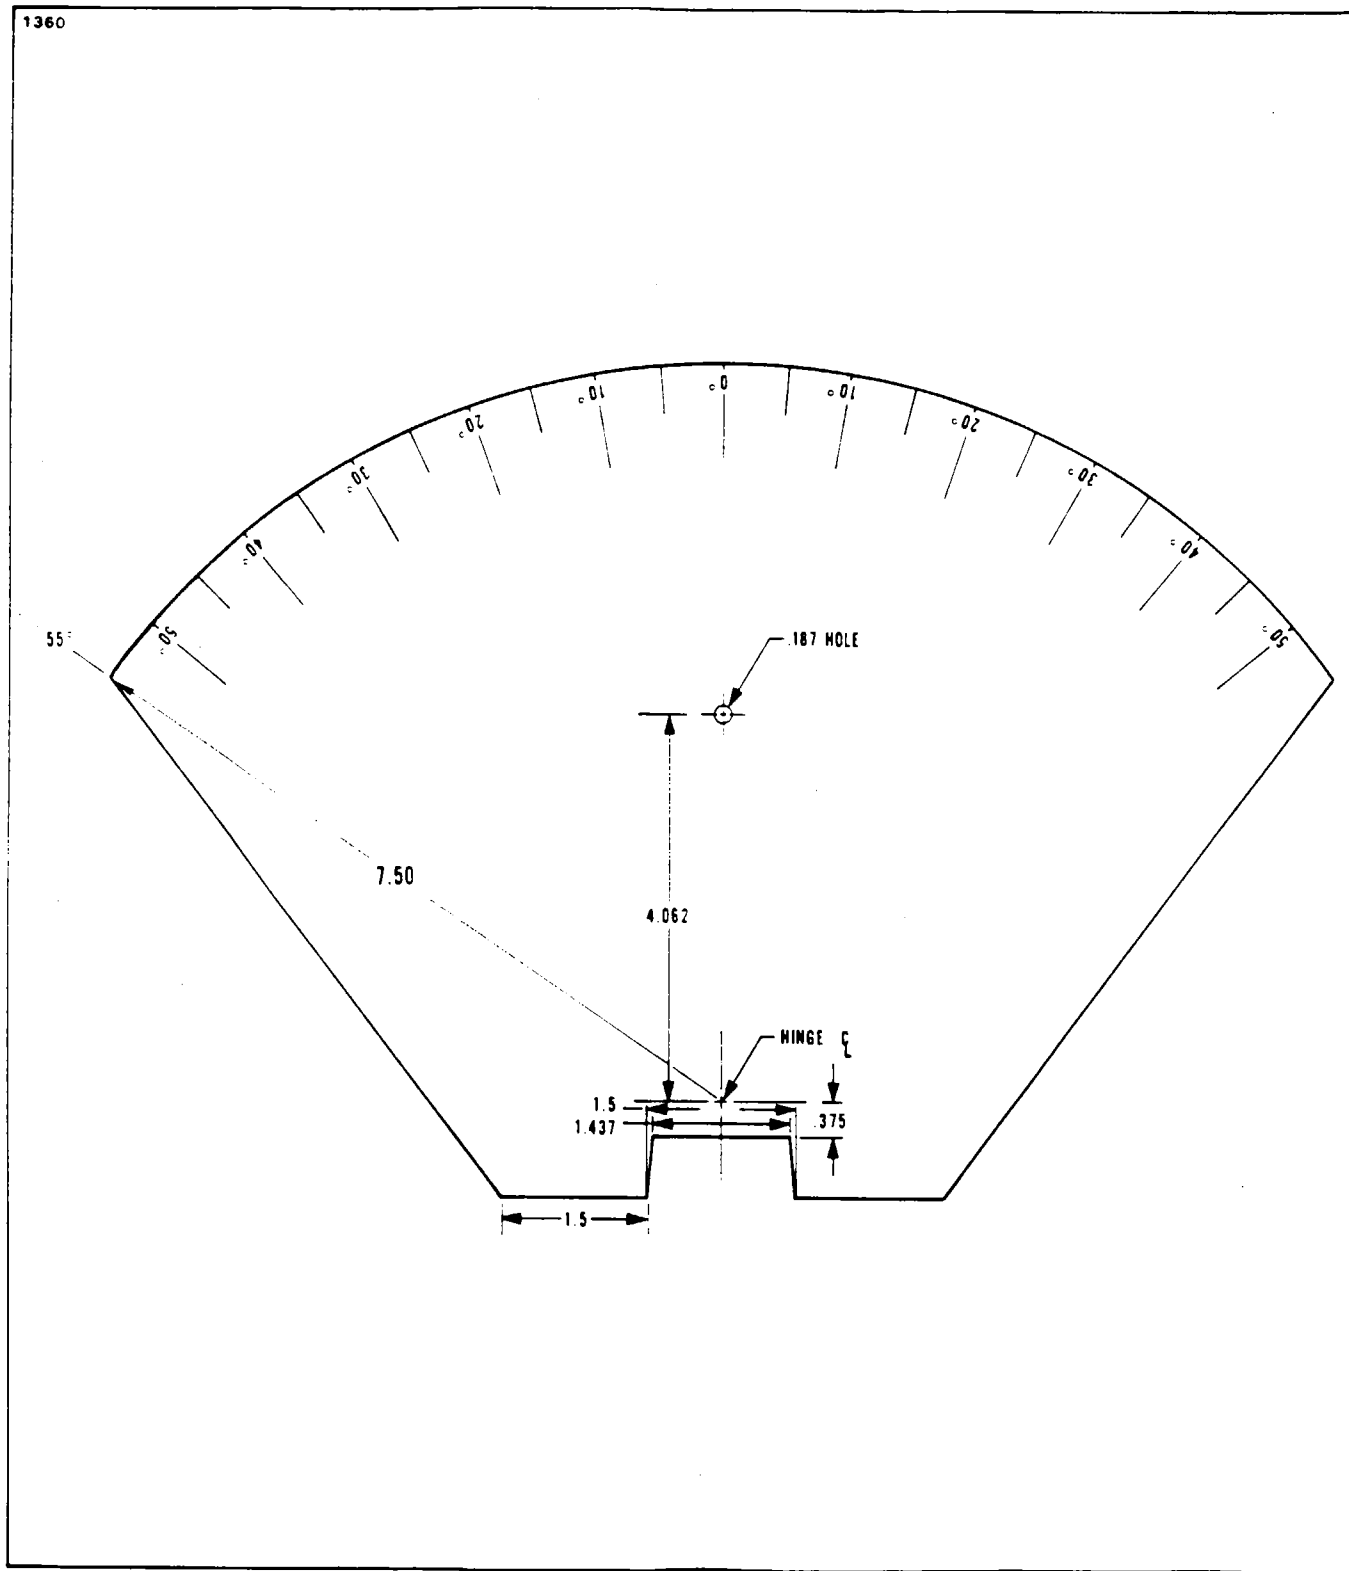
Fabricated Rudder Trim Tab Rigging Tool
